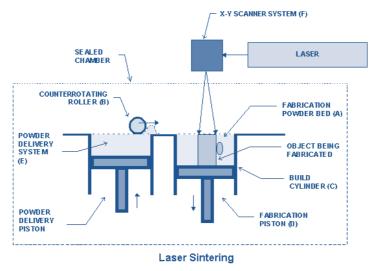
Selective Laser Sintering method Courtesy of www.additive3d.com
